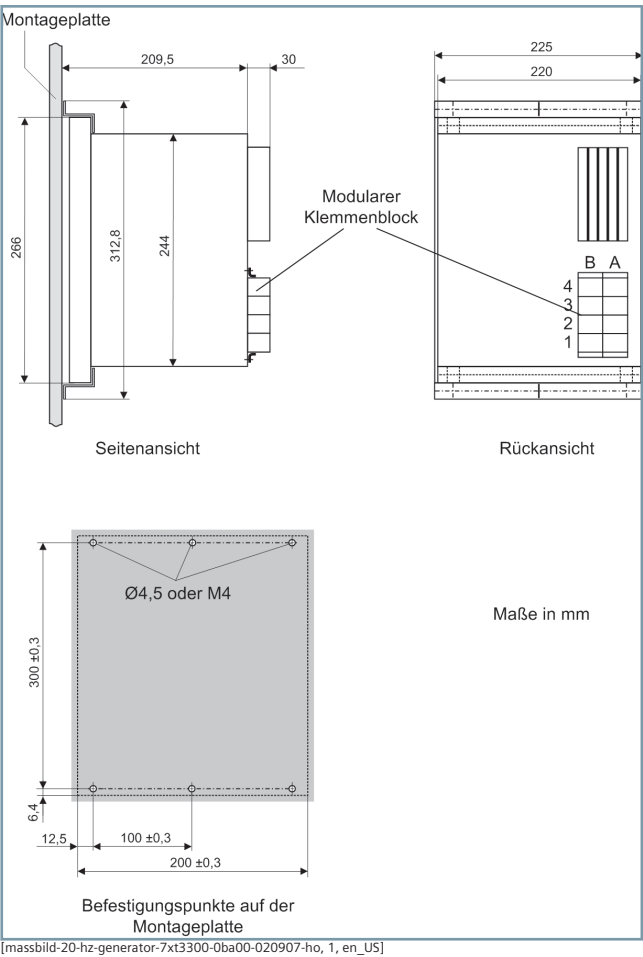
/5 Dimensional Drawing, 20-Hz Generator 7XT3300-0BA00 for Panel Surface Mounting
